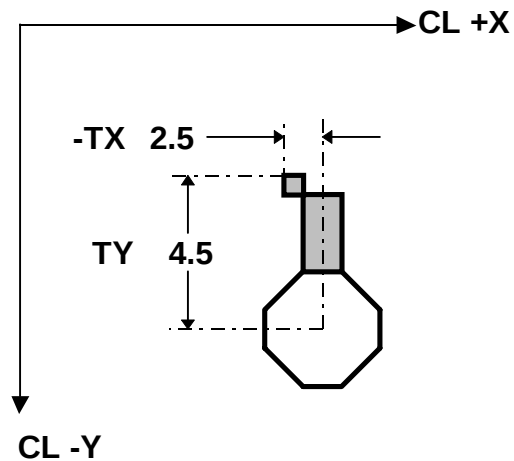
Fourth Quadrant Lathe Gauge Lengths
